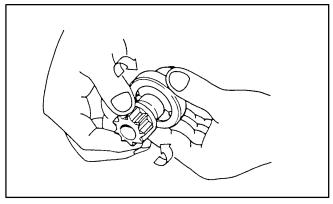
CHECKING OPERATION OF THE PIN-ION OVER-RUNNING CLUTCH
